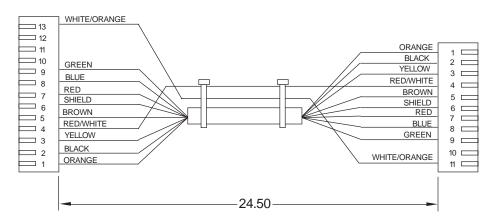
EC1939-01 HARNESS ASSEMBLY - PREAMP/ACCESSORY BOARD INTERCONNECT
